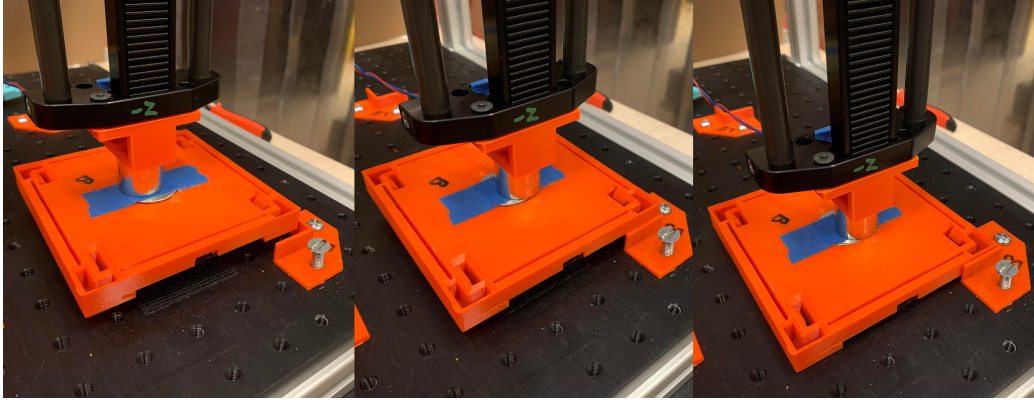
The procedure for installing the bottom. First, it is brought to the assembly area, where it may be slightly askew (due to incomplete grip in the magnet, improper initial placement, or other anomalies). It is aligned using the alignment jig. It is then pressed in, engaging the Velcro.
